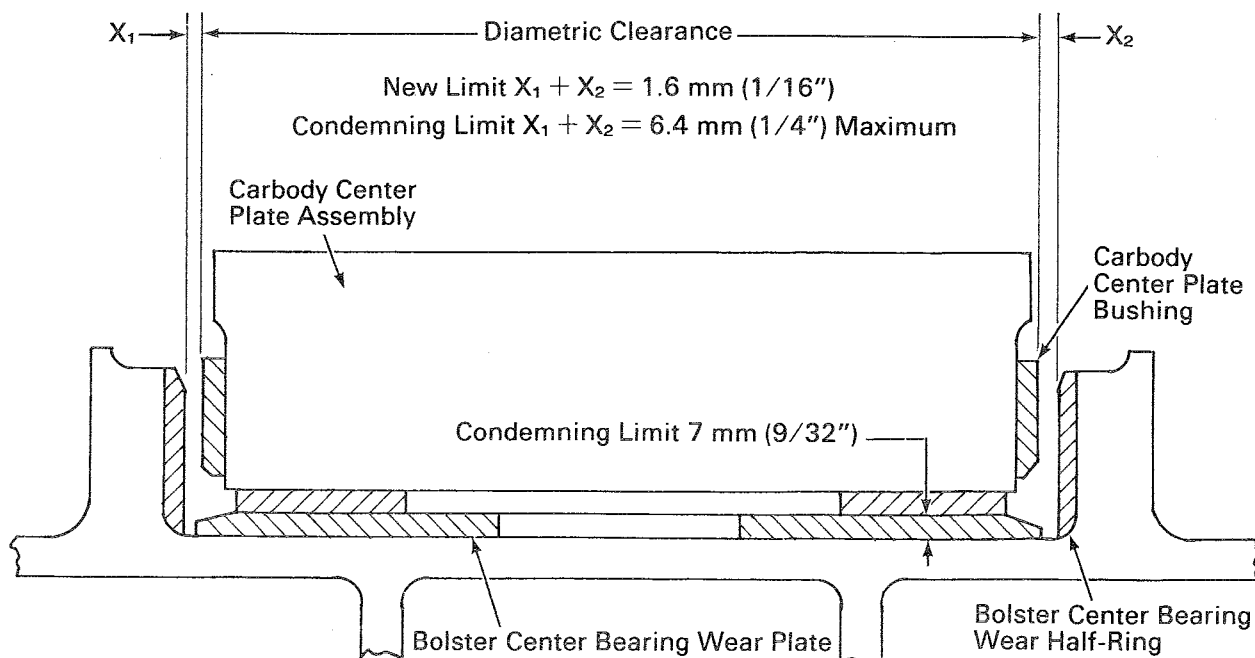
Carbody Center Plate And Bolster Center Bearing Clearance
